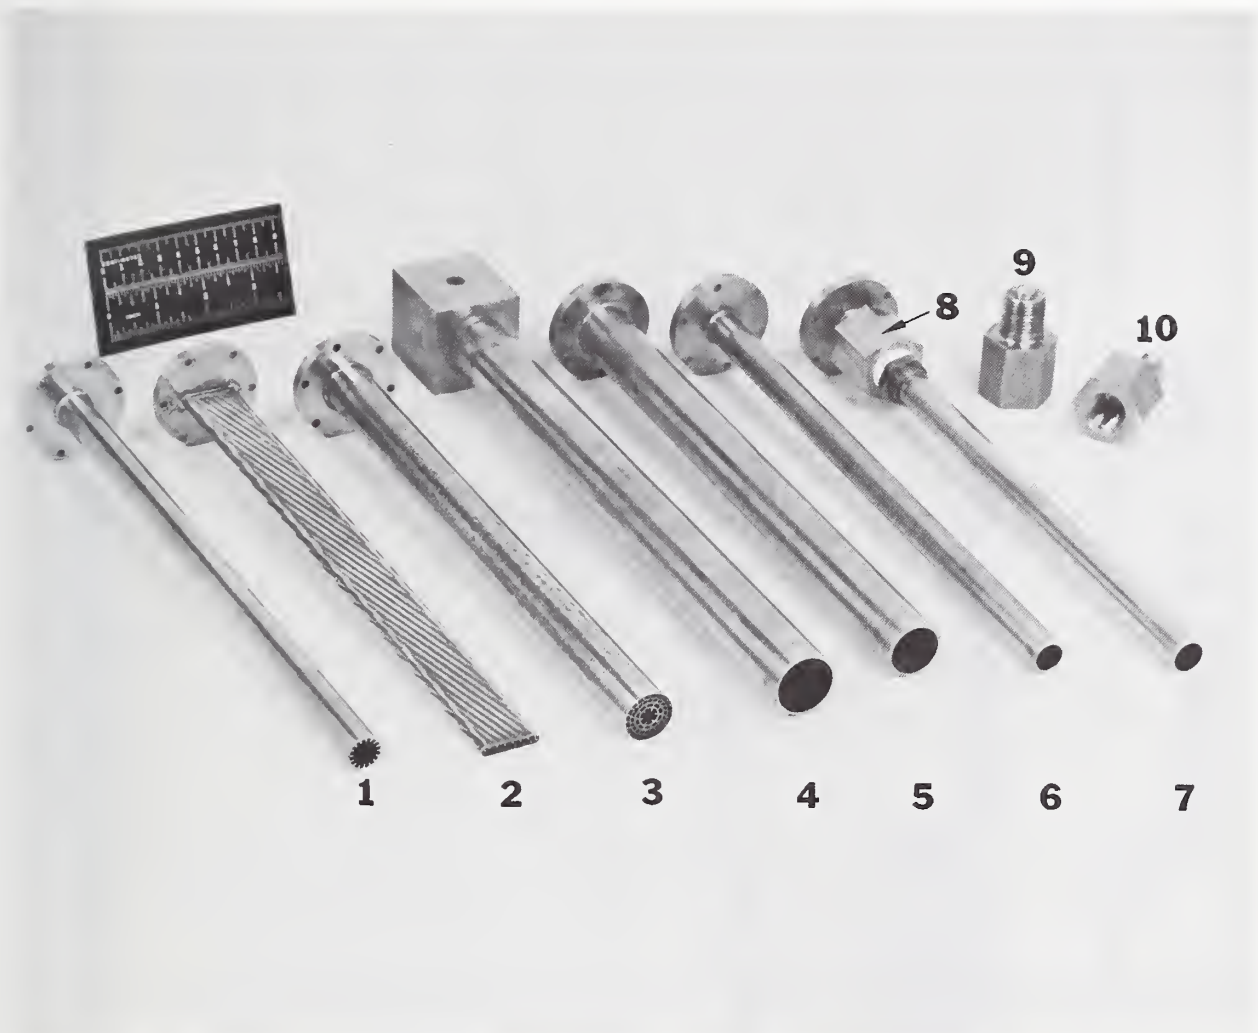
TUBES AND FILTERS USED IN EXPERIMENTS WITH THE UNIVERSAL TEST FIXTURE. 1-SPIRAL FLUTED TUBE; 2-FLAT TUBE; 3-51 CHANNEL TUBE; 4-ONE-PIECE TEST FIXTURE; 5-SMOOTH TUBE, 2.2 CM (0.9 IN.) INSIDE DIAMETER; 6-SMOOTH TUBE, 1.3 CM (0.5 IN.) INSIDE DIAMETER; 7-SMOOTH TUBE, 1.3 CM (0.5 IN.) INSIDE DIAMETER, WITH FILTER "C"; 9-FILTER "E"; 10-FILTER "HX".
